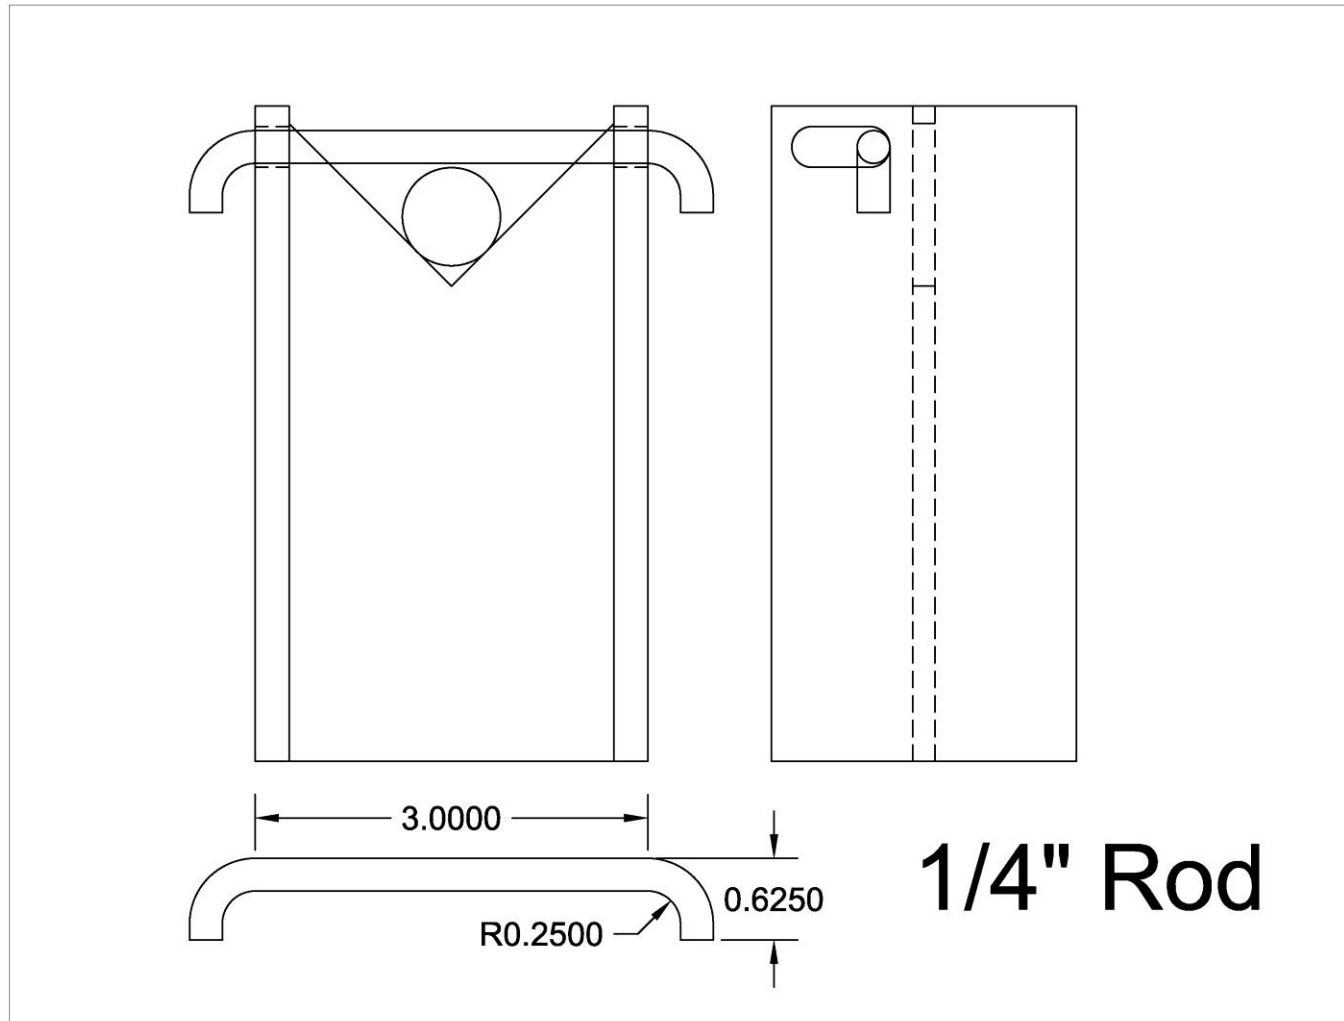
1/4 in. (6.4 mm) Diameter, Straight Rod with Bent Ends Detail
